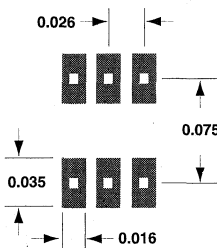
PCB Pad Layout for INA-54063 (dimensions in inches).
